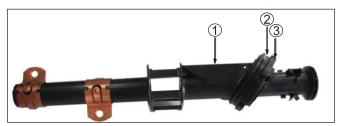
Outer Tube with Contacts Gasket and Tightening Nut
